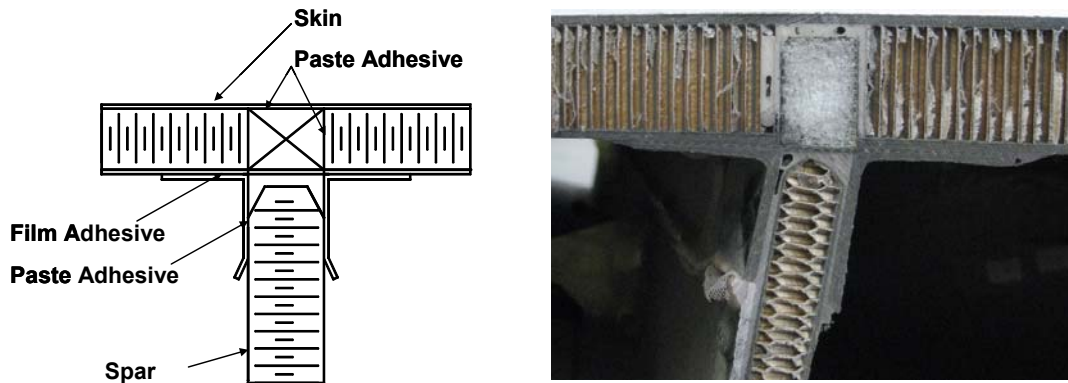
Beechcraft Starship Aft Wing Structural H-Joint Details (left) and H-Joint Extracted from BL78 Upper Skin Center Spar (right)
